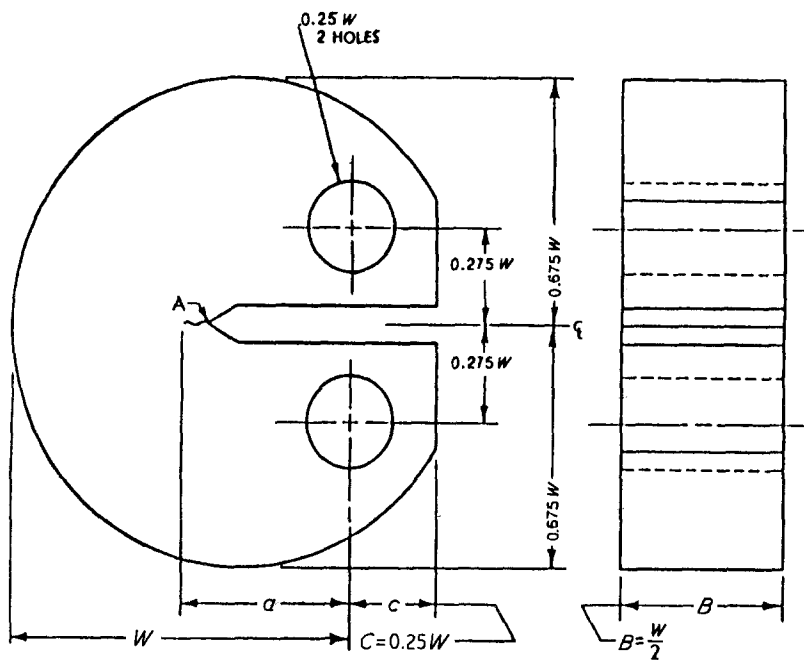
General dimensions of the disc-shaped compact tension specimen DC(T). A is the machine notch tip.
